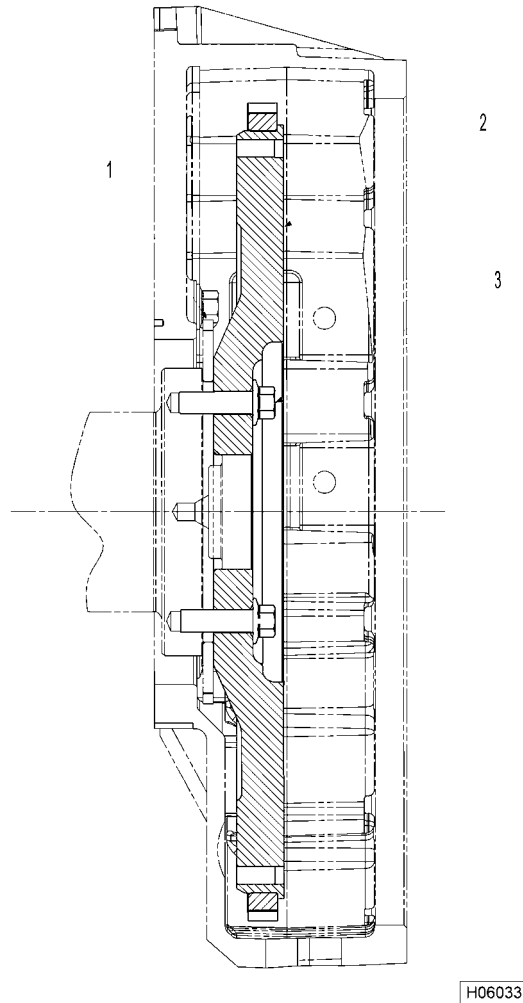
14 inch flywheel - for multiple plate clutch applications, 800 lbf-ft and below
